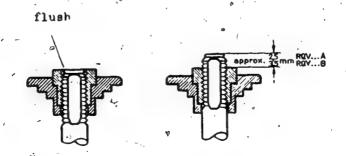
Tolerances for adjusting the threaded bolts
